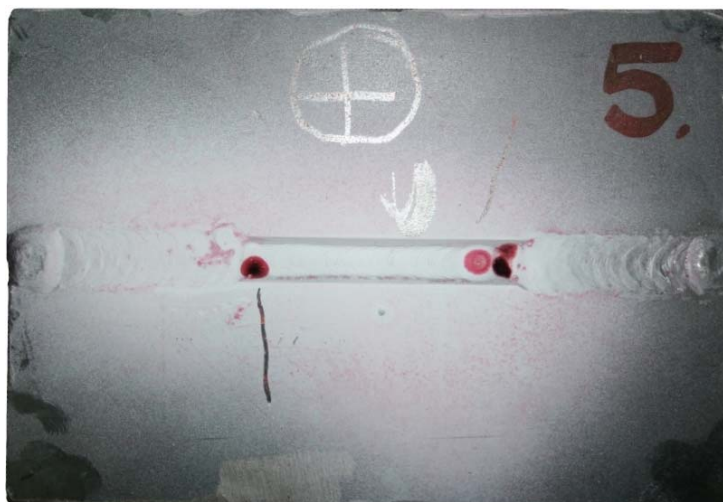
Sample P1 - welded in the air environment after the penetration test. No cracks, single pores
